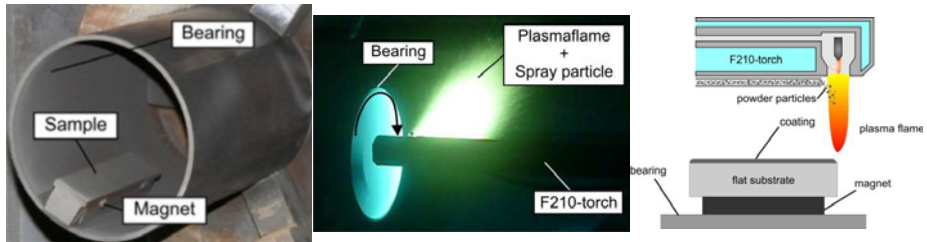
Experimental setup for internal coating of flat samples (left), plasma coating of a flat sample in a bearing (centre) and schematic coating process of a flat sample bound to magnet in a bearing (right).
